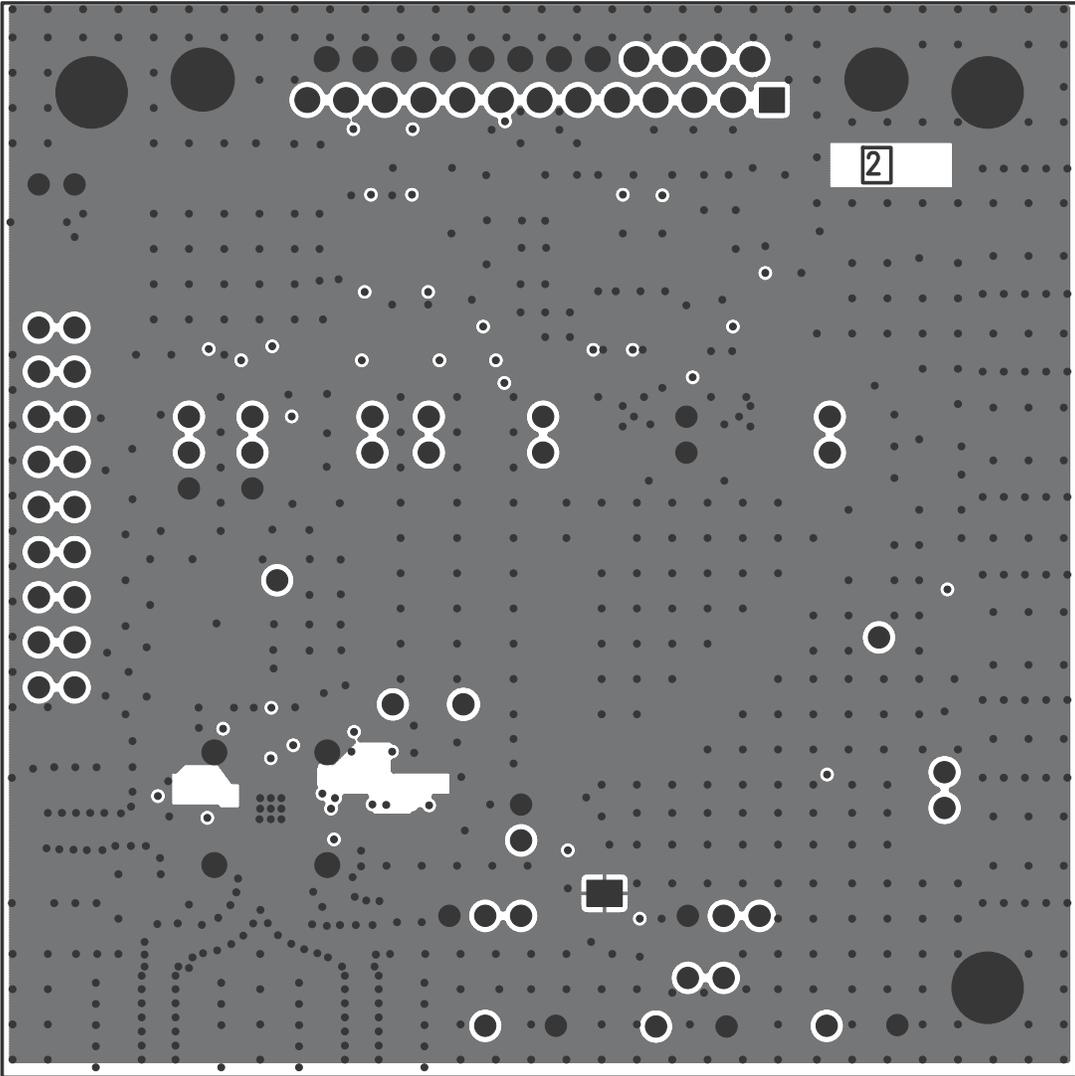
MAX2163 TQFN EV Kit PCB Layout—Inner Layer 2
